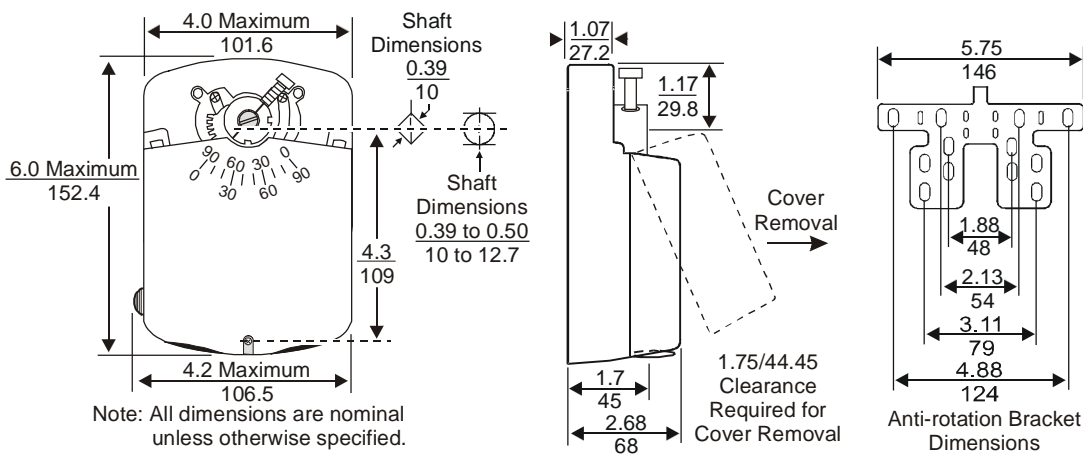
Actuator and Anti-rotation Bracket Dimensions, in. (mm)
